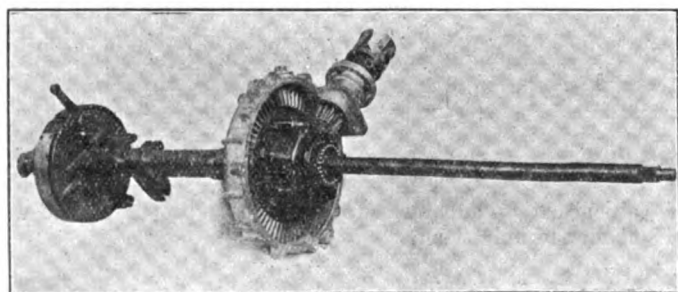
View of Live Axle on Singer Car, showing Differential and Bevel Gear.
